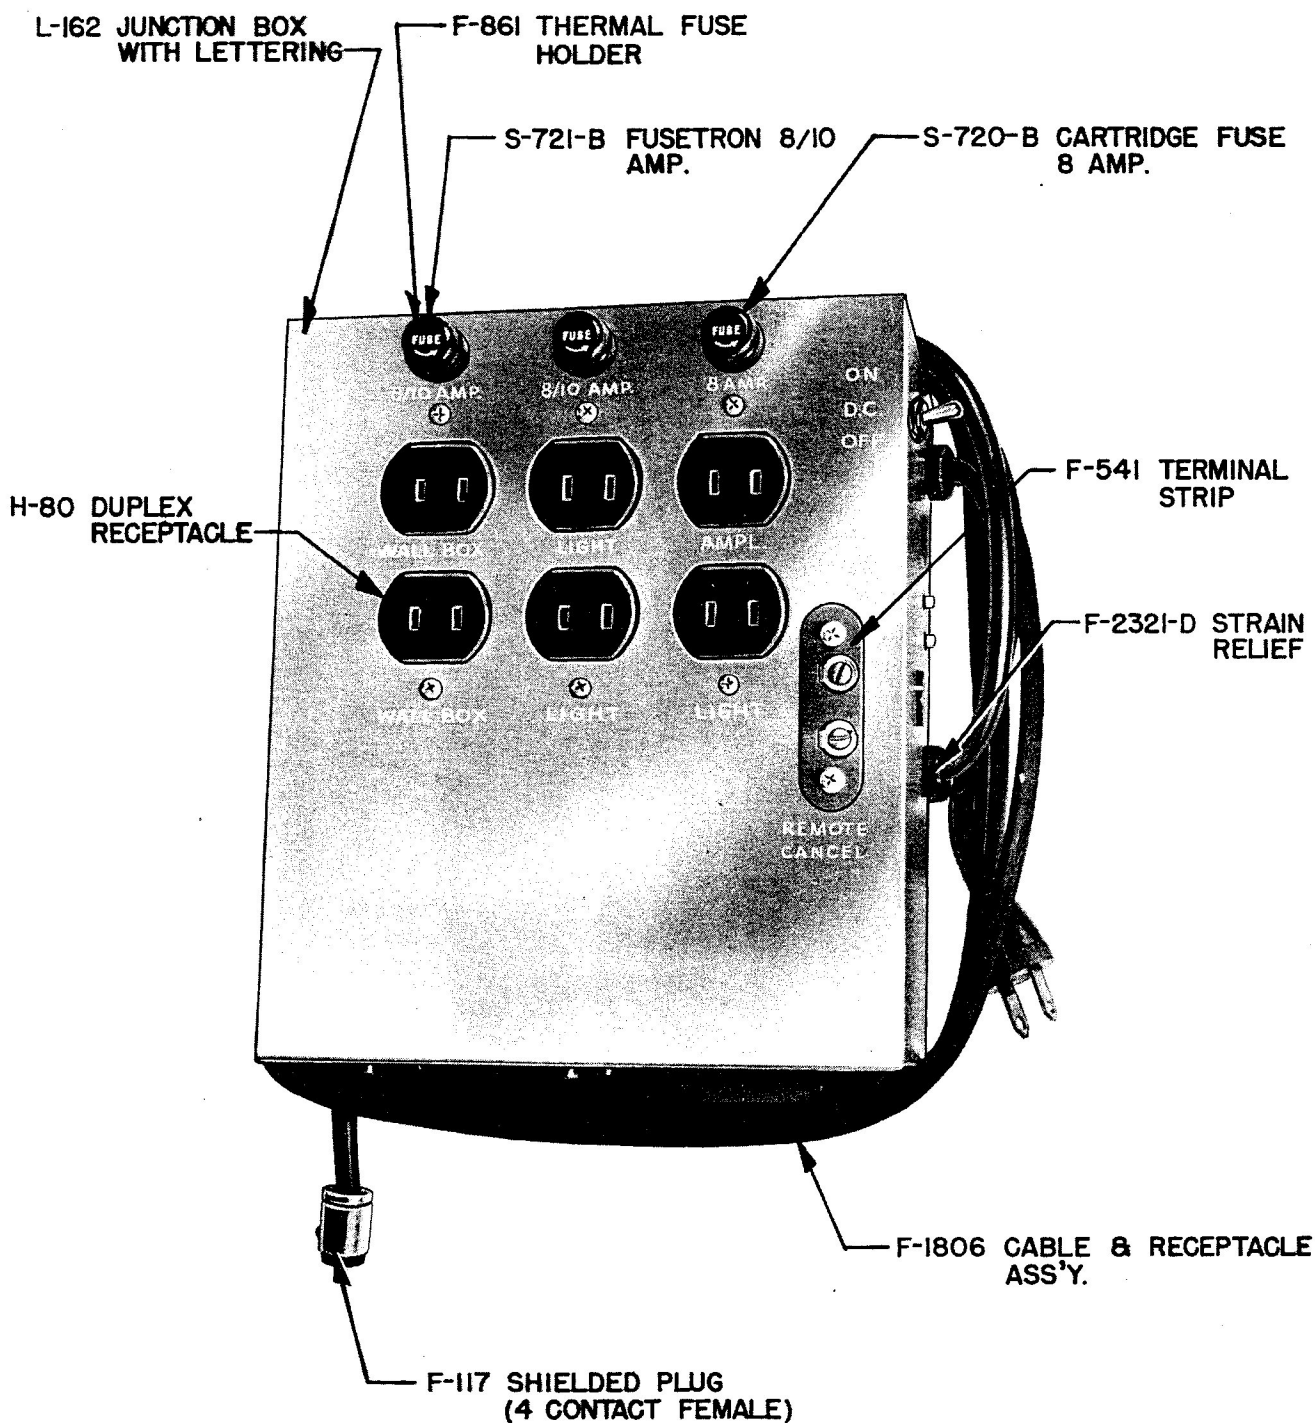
JUNCTION BOX ASSEMBLY - FRONT VIEW
